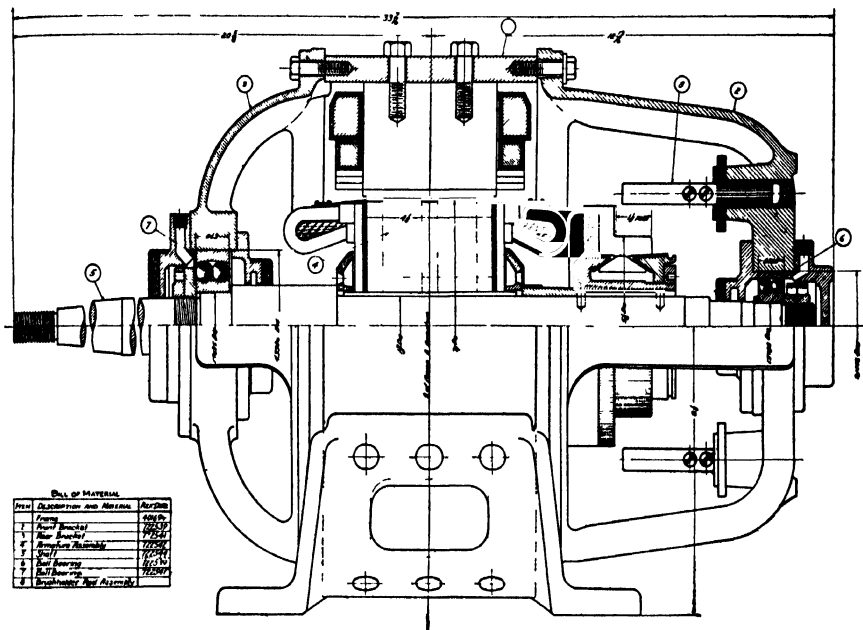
⁴ Assembly drawing of ball-bearing motor.
